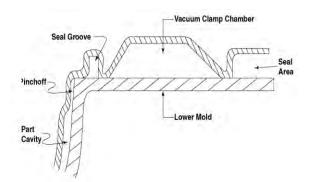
A flange detail for the upper mold shell laminate type incorporates two seals and a vacuum clamp chamber to hold the upper mold to the lower mold.
